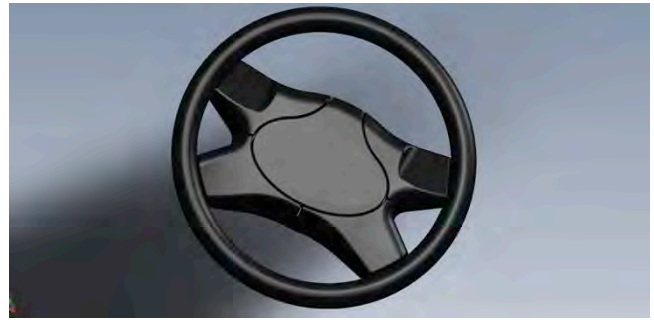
Early foam core prototype of steering wheel gesture pad.
